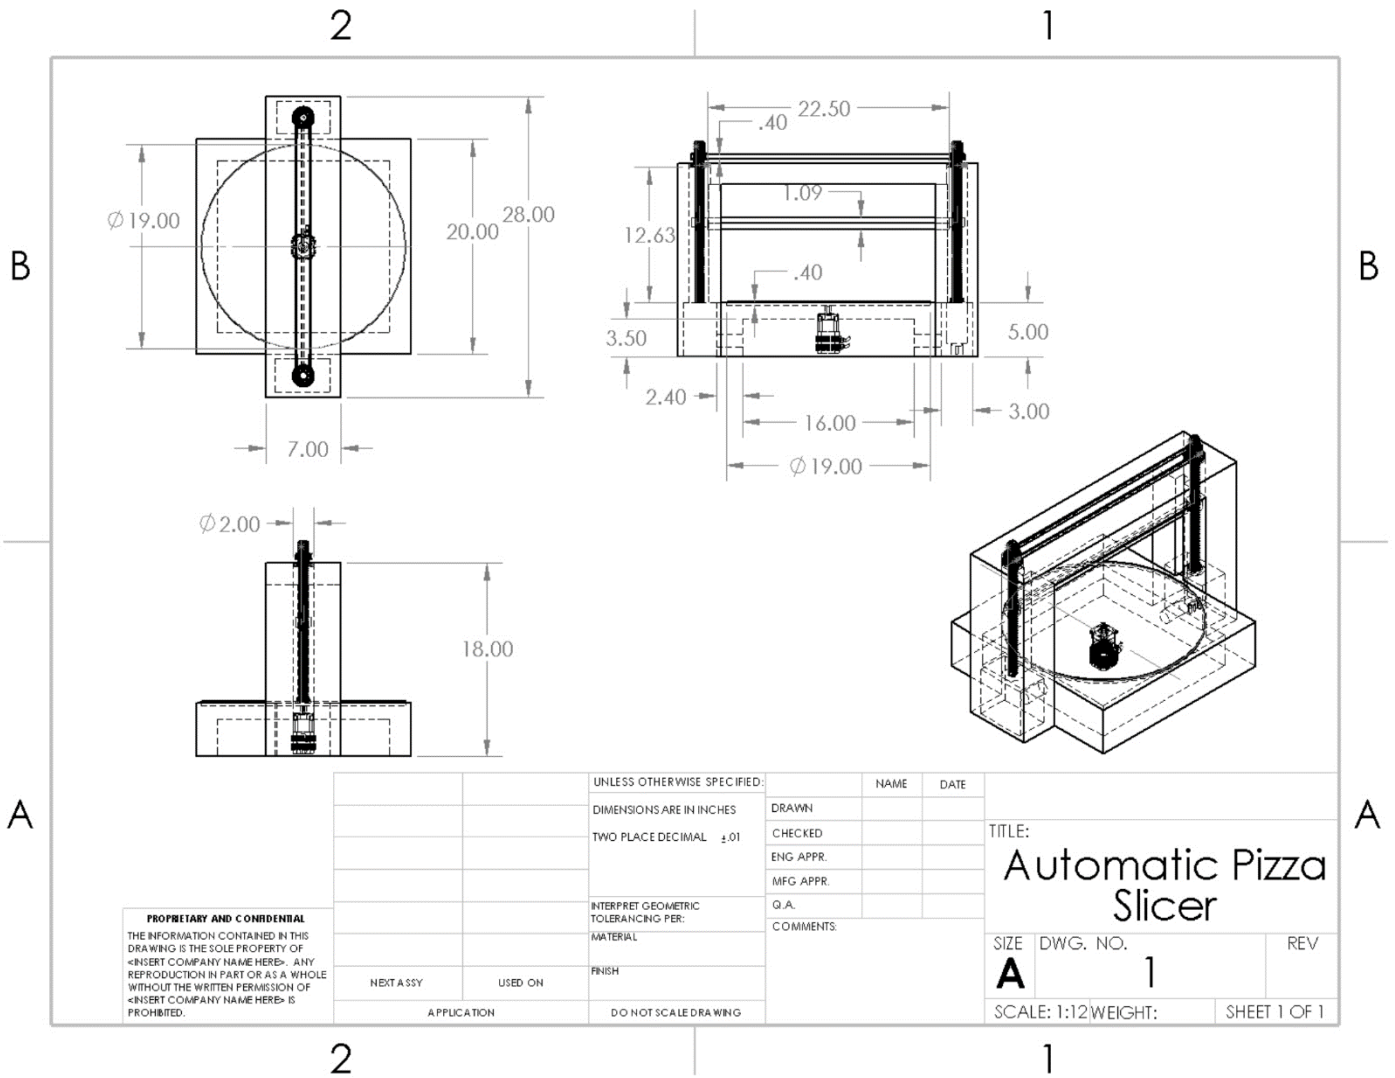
CAD drawing showing top, right, side, and isometric view as well as overall dimensions
